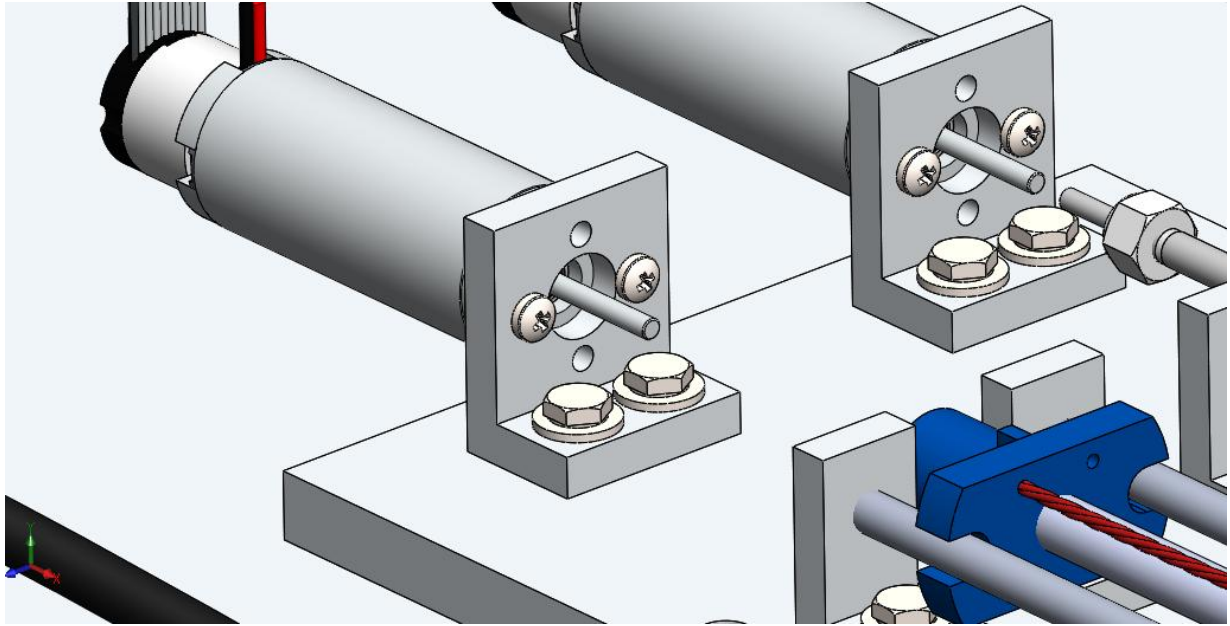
Assembly of the flange with the master motor and the base. Modified from [4].
